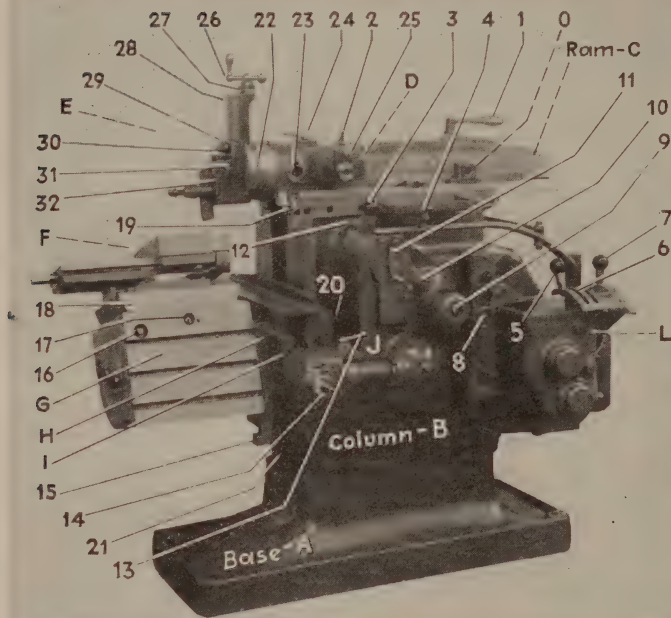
Standard 14-in. Shaper. (Courtesy of The Hendey Machine Company.)
